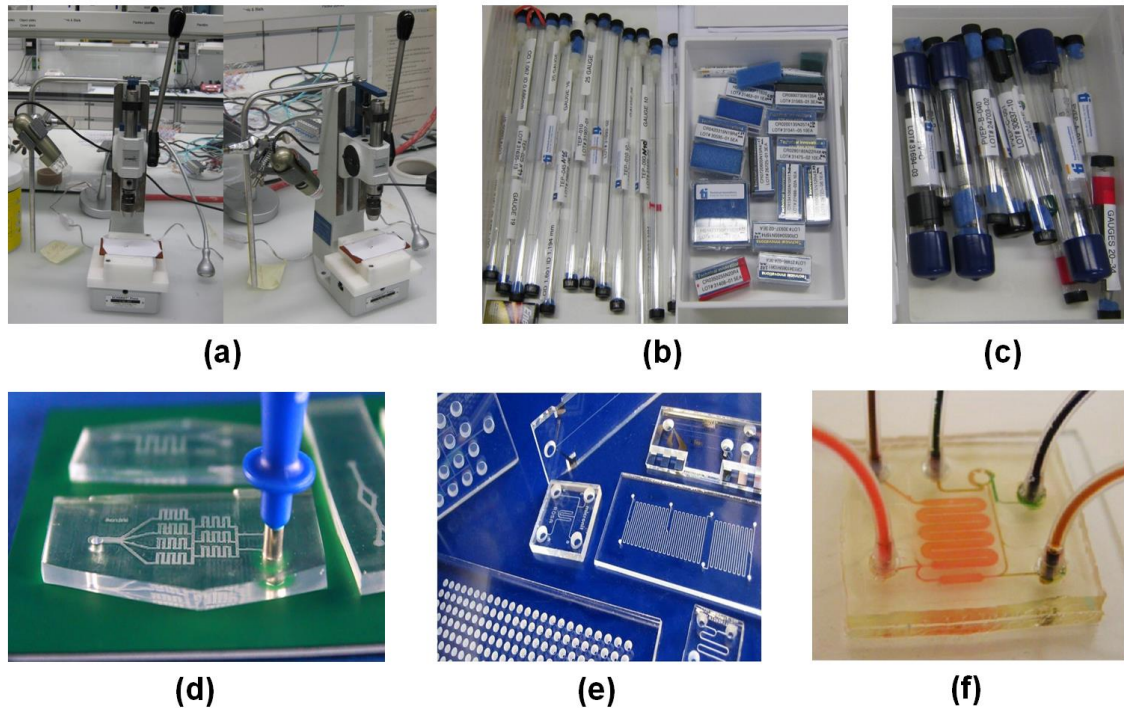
Hole punching in PDMS microfluidic devices. (a) A hole-punching machine equipped with a light source, (b) required accessories for hole-punching machine i.e. gauge or ejector (left) and punching pins (right), (c) manual puncher with accessories, (d) a microfluidic device getting hole-punched[108], (e) samples of punched microfluidic chips[109], and (f) a microfluidic device under operation with tubing inserted into the punched holes[110].
